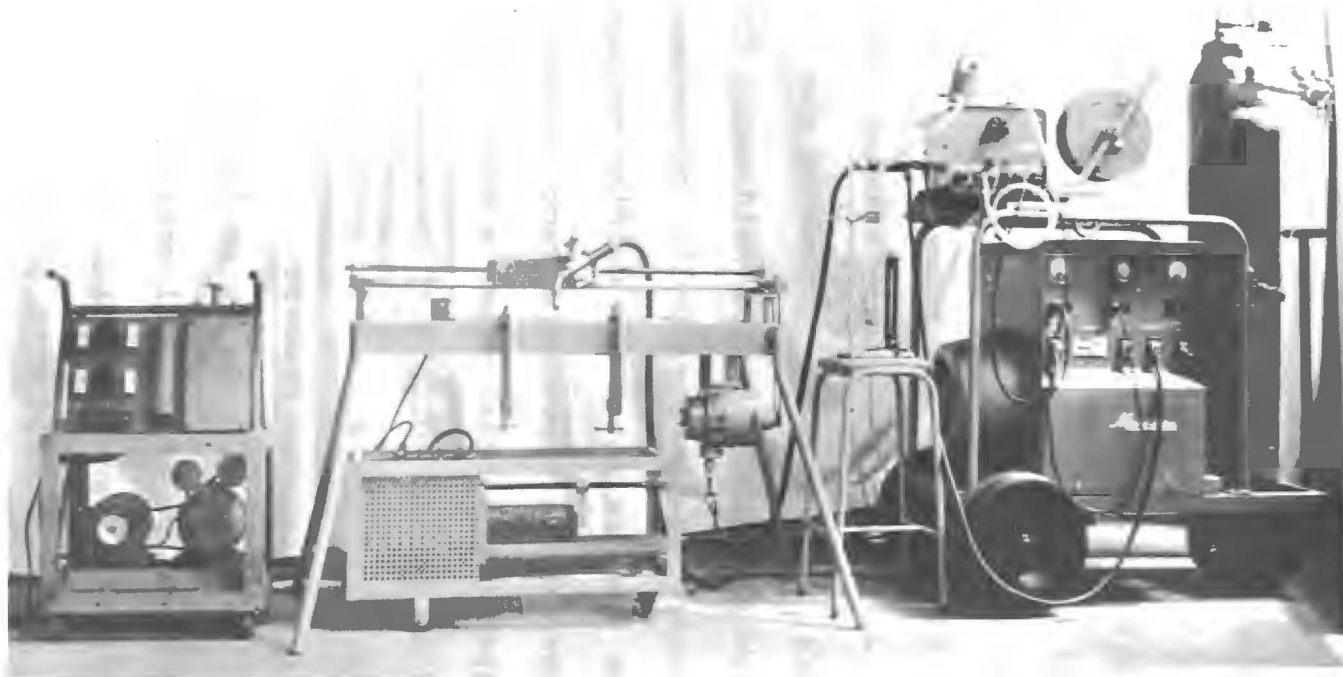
Welding equipment.(Showing Ward-Leonard Set,Welding Rig and the Hobart Brothers Micro-wire MIG Welder as from the left).
